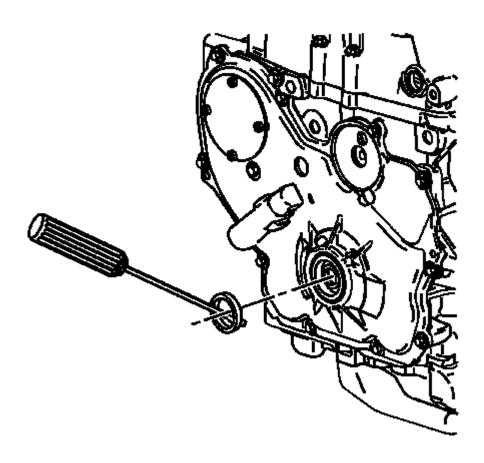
Crankshaft Front Oil Seal Courtesy of GENERAL MOTORS COMPANY
